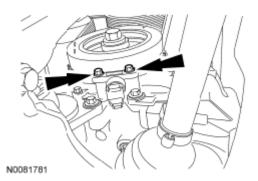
Locating CKP Sensor And Bolts Courtesy of FORD MOTOR CO.
